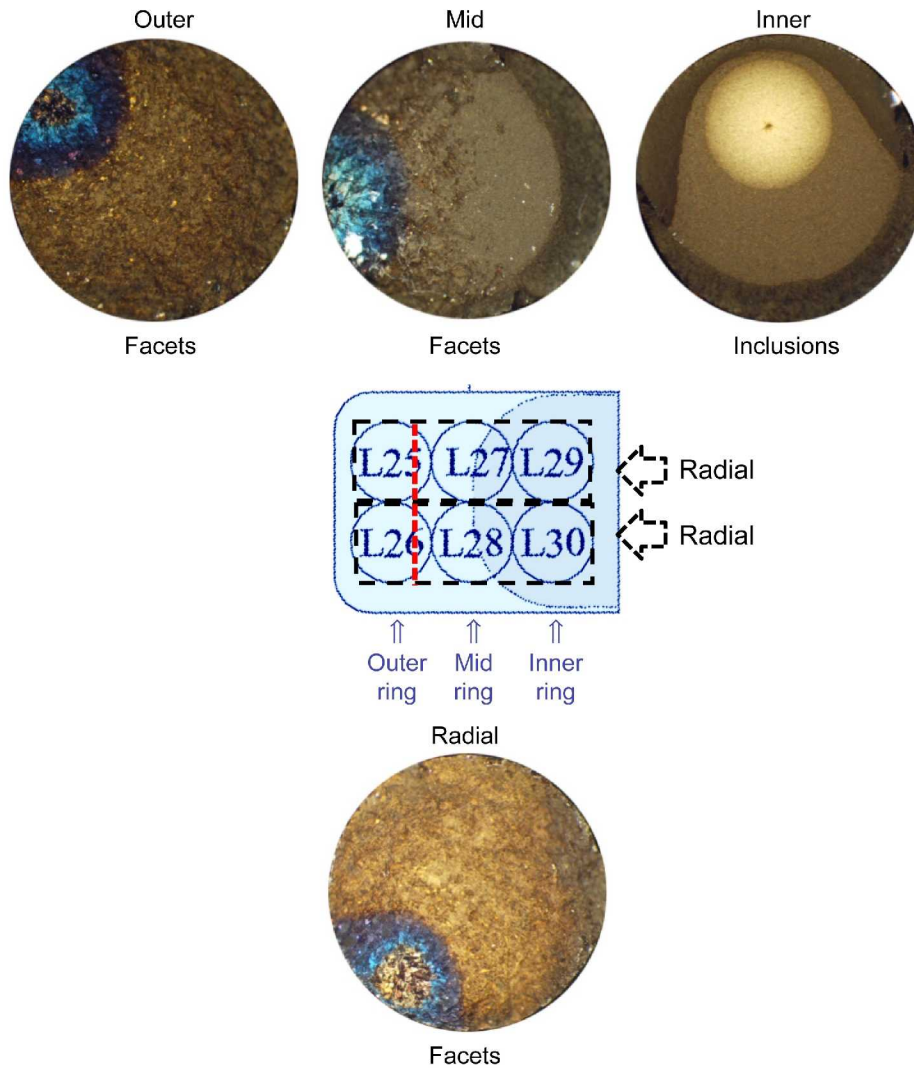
Typical fatigue failure initiation sites: (a) facet failures initiating at coarse grains near or at the specimen surface for outer and mid specimens, internal inclusion failures for inner specimens, (b) near-surface facet failures at coarse grain ends (red lines) of radial specimens.
